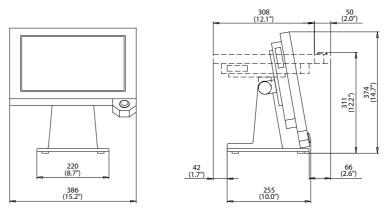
POS S15 (Dimensions in millimeters and inch)
